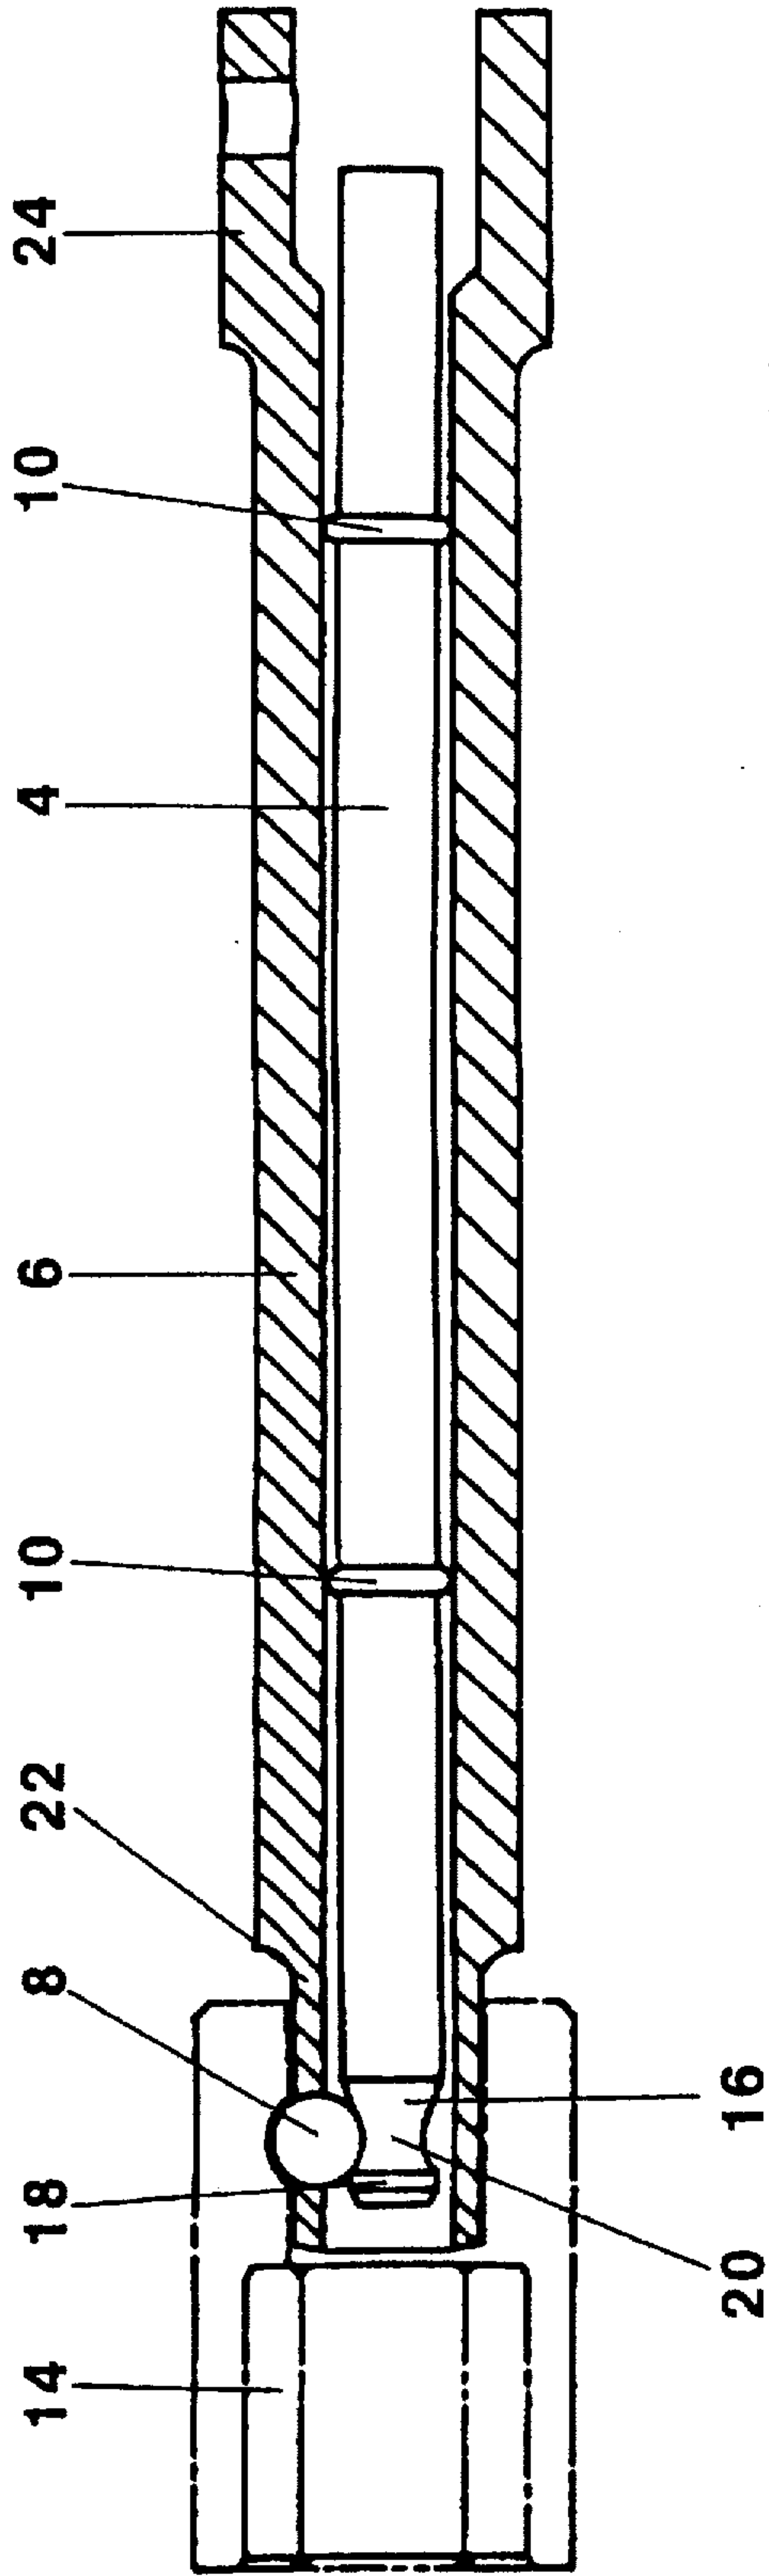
SOCKET RETAINED BUT NOT LOCKED
